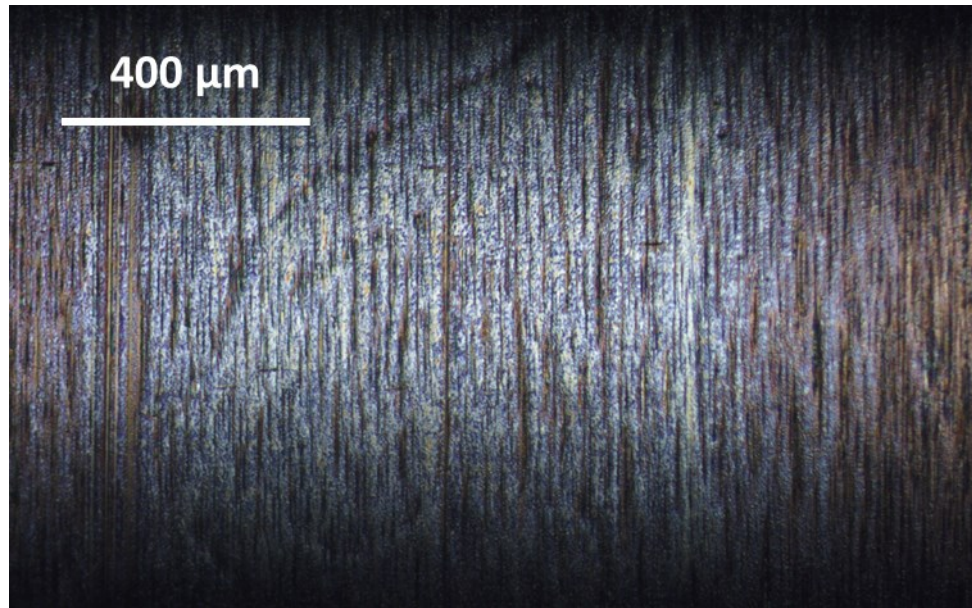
Test 18: Surface of flat roller in elliptical contact configuration. After 55 million contact cycles, the surface is still exhibiting the grinding marks from manufacturing, with no presence of cracks or other sort of damage on the surface
